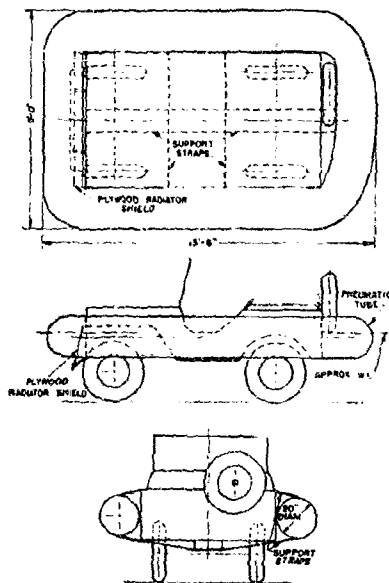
Diagram of collapsible pontoon design for standard 1/4-ton, LVT jeep.
